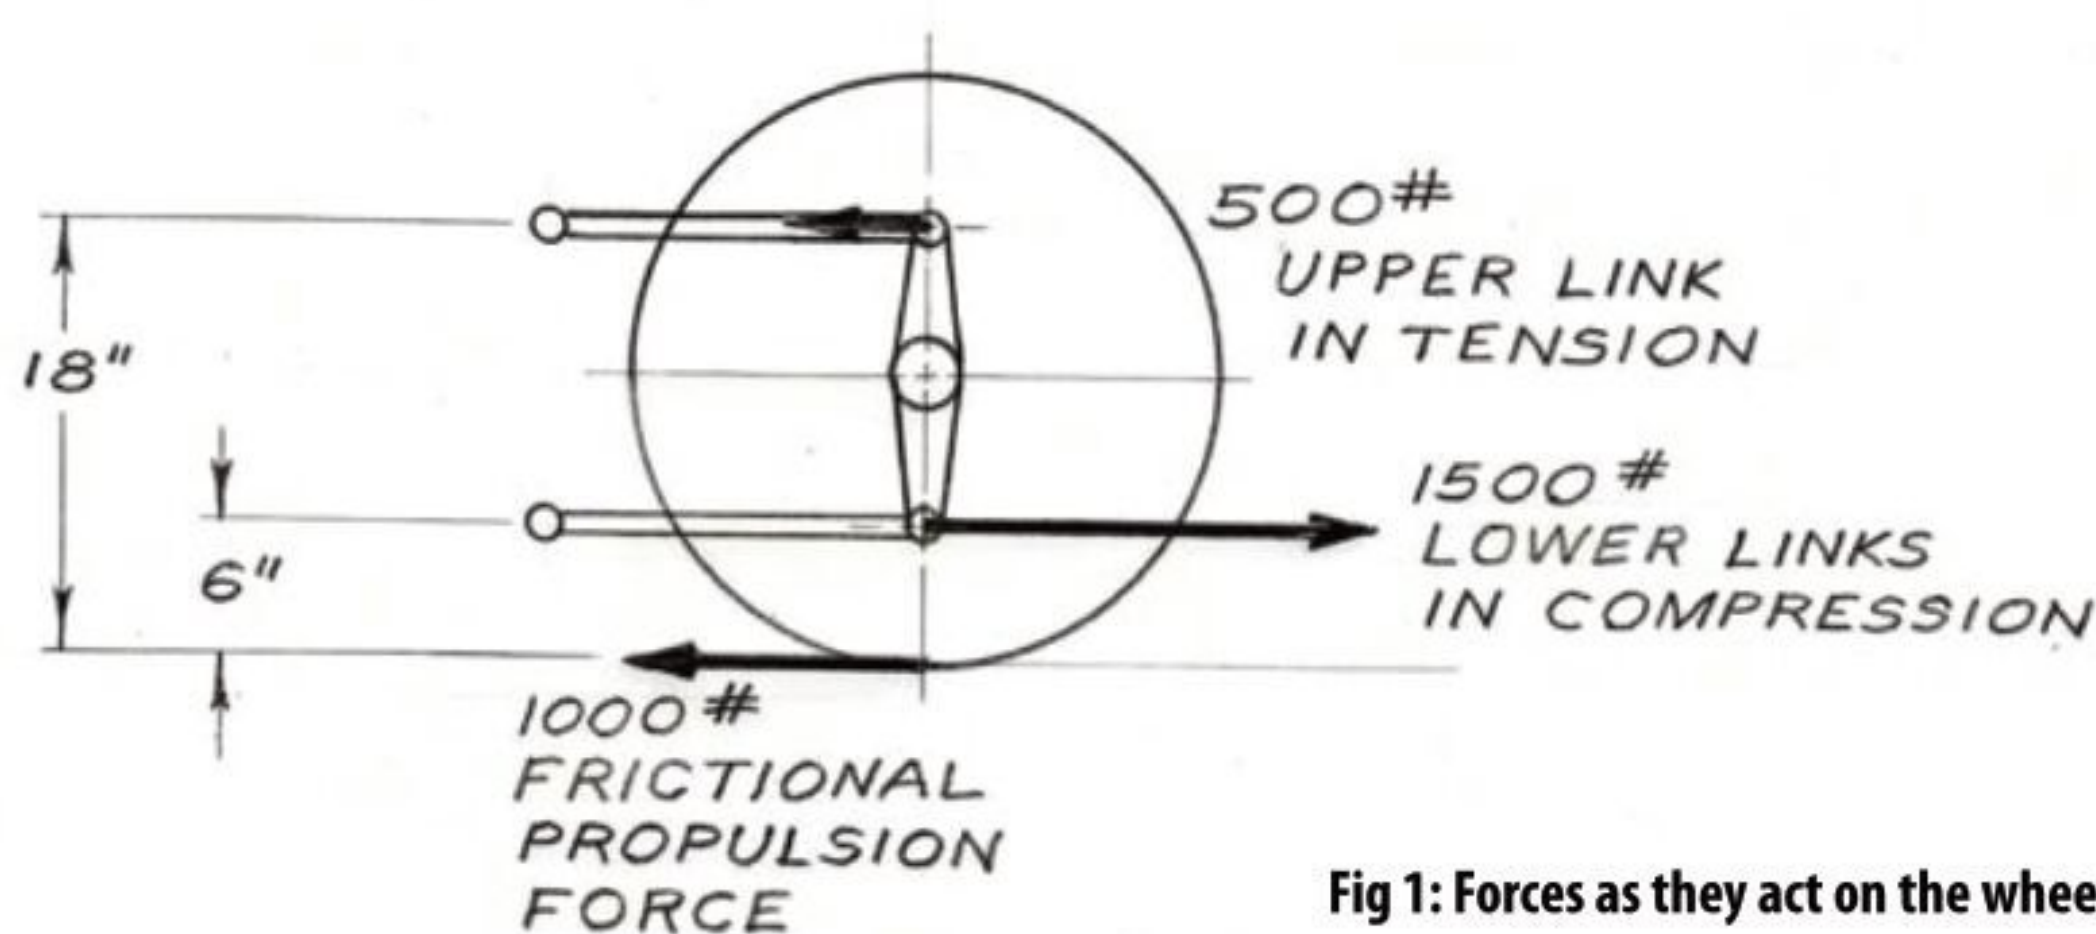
Forces as they act on the wheel and axle assembly with horizontal links
